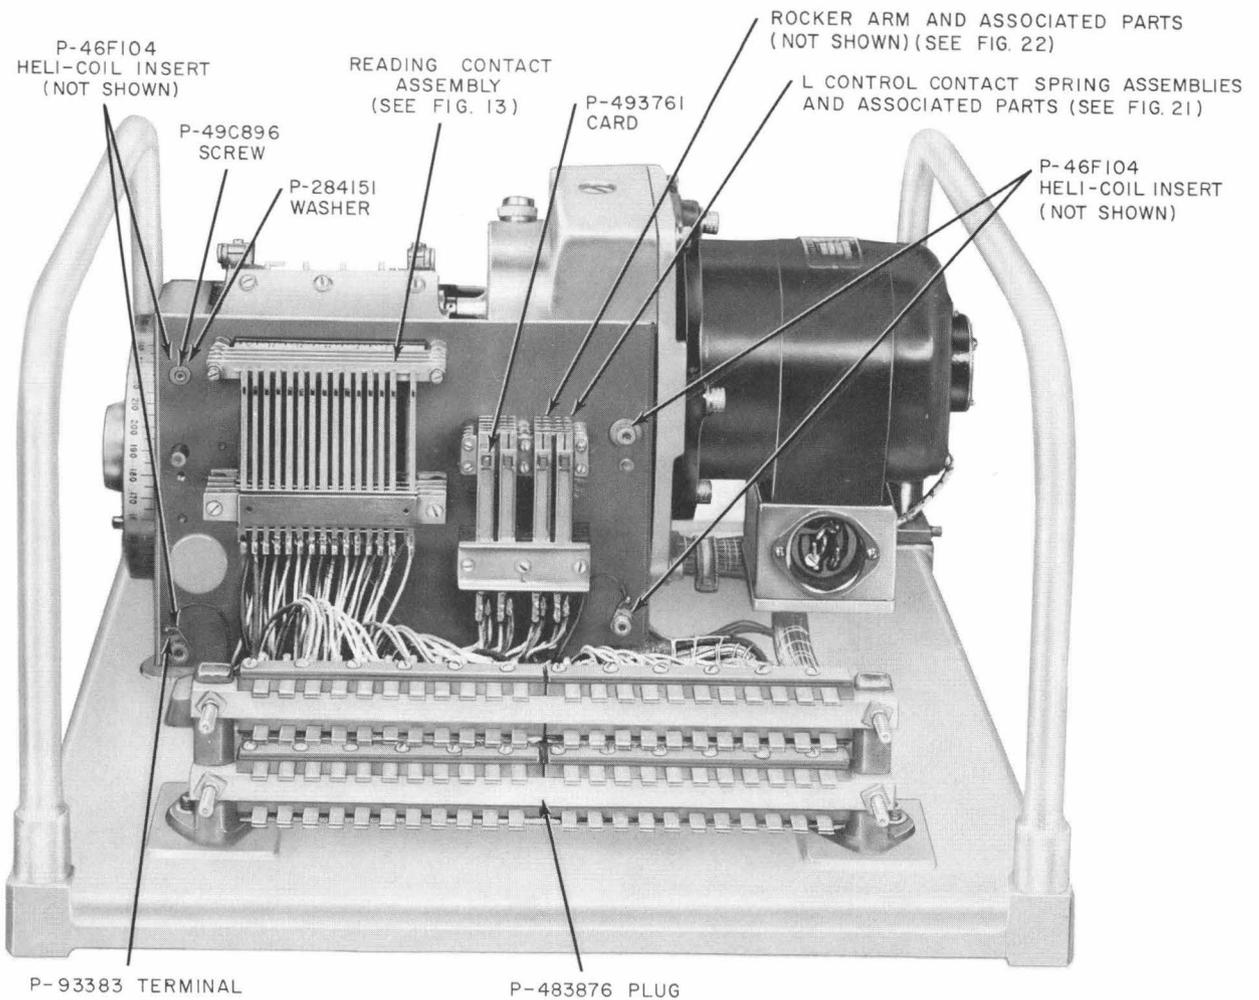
KS-13835 L5, L6, and L7 Readers—Rear View with Cover Removed
